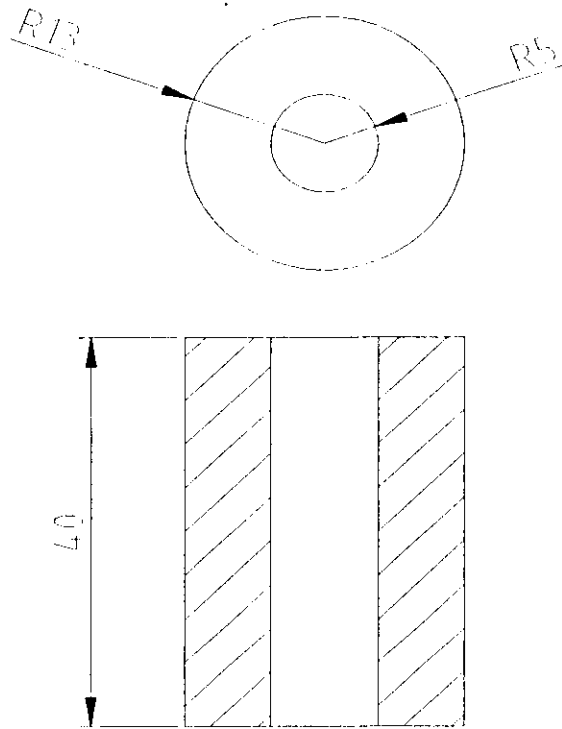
A hollow cylinder produced by extrusion for inversion tests
